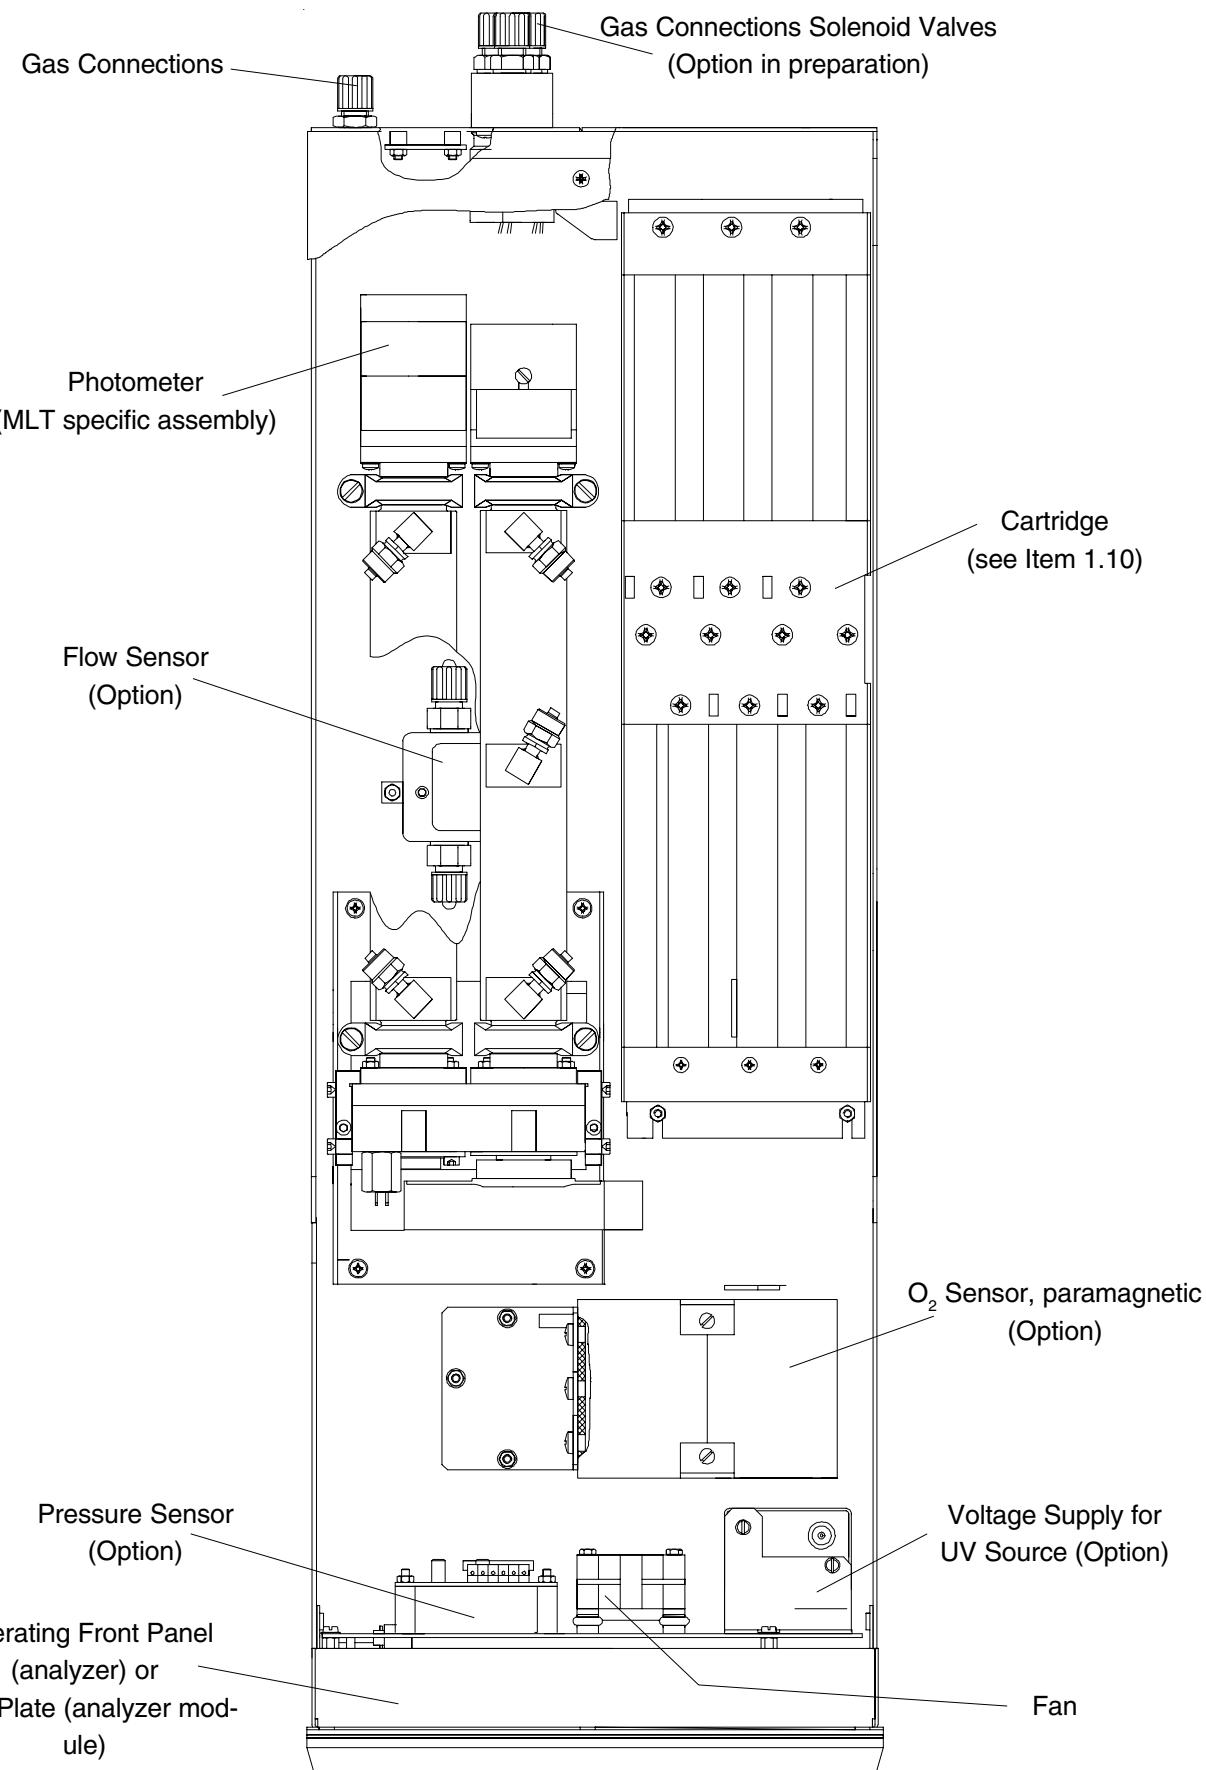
MLT 1, Rack/Table-top Housing extended, Top view
